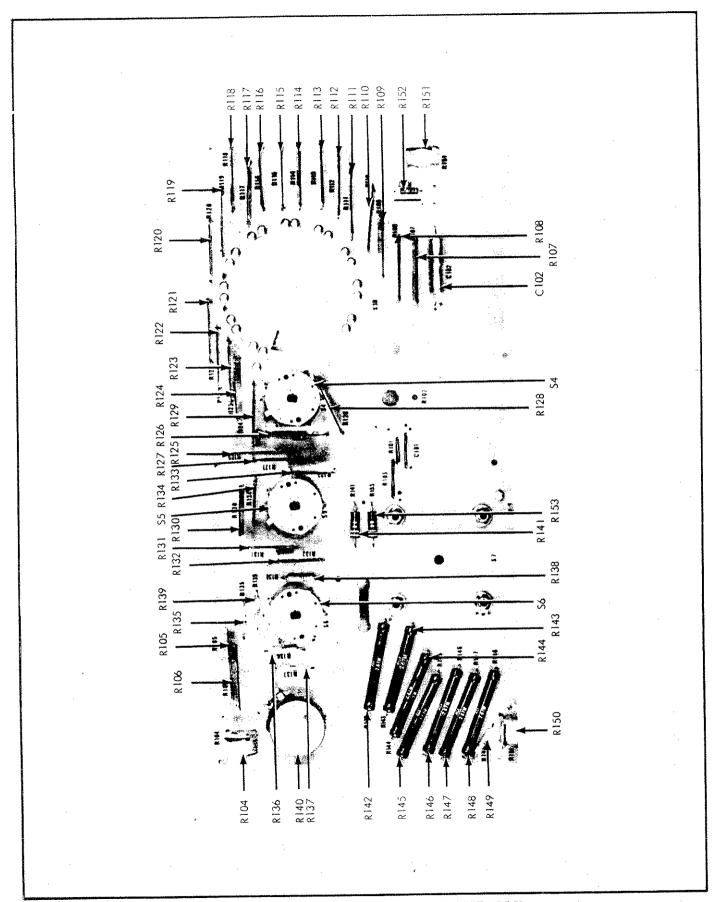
SWITCH CIRCUIT BOARD ASSEMBLY
